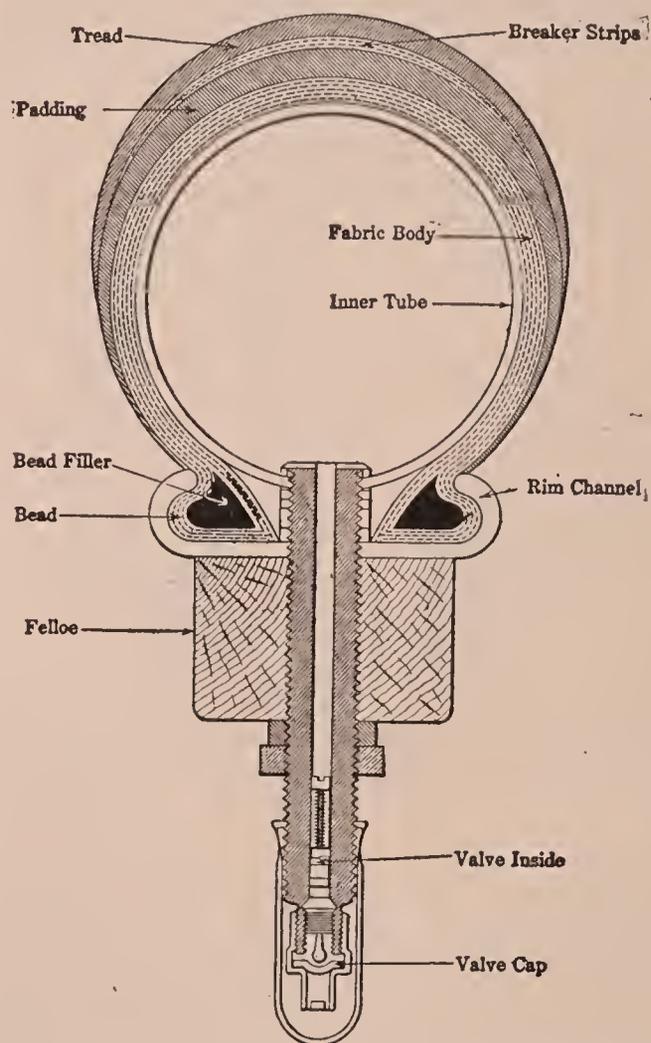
Another tire section, showing all casing parts, as well as an inner tube in place and a section through the valve.
